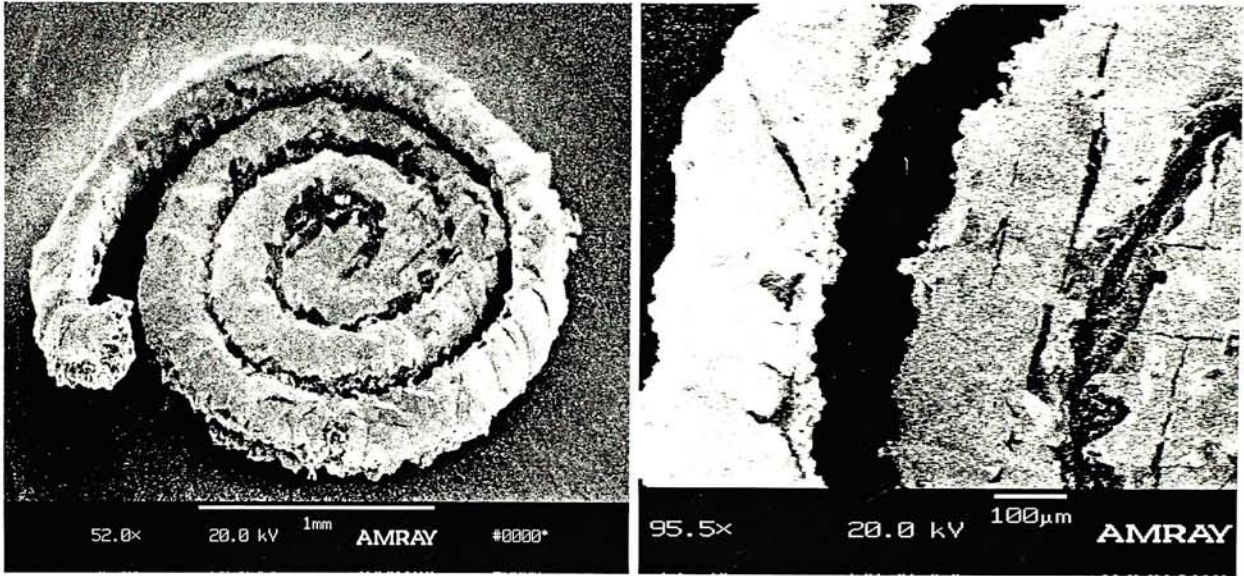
(Left) Nd:YAG laser micromachined spring pattern. (Right) Showing laser micromachined spring with spring width of ~200µm.
